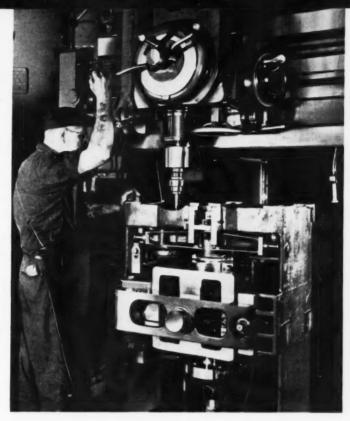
Because of obstructions on the work surface, a milling machine replaces a lathe for this turning operation.
